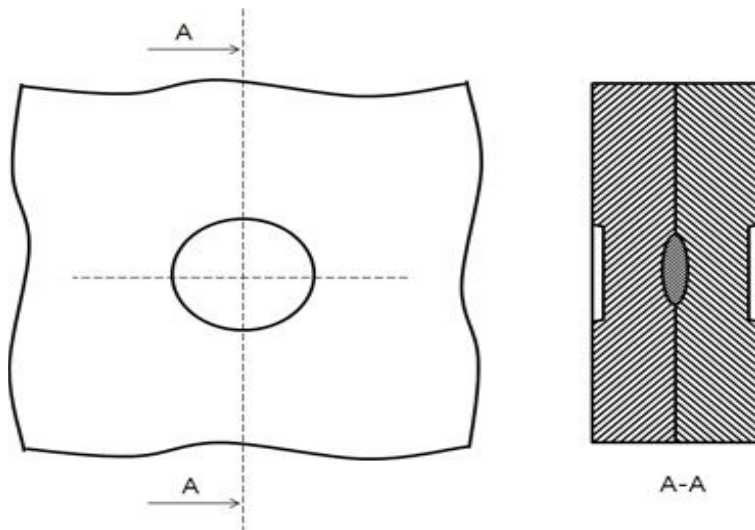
Plan and cross section of resistance spot welding
